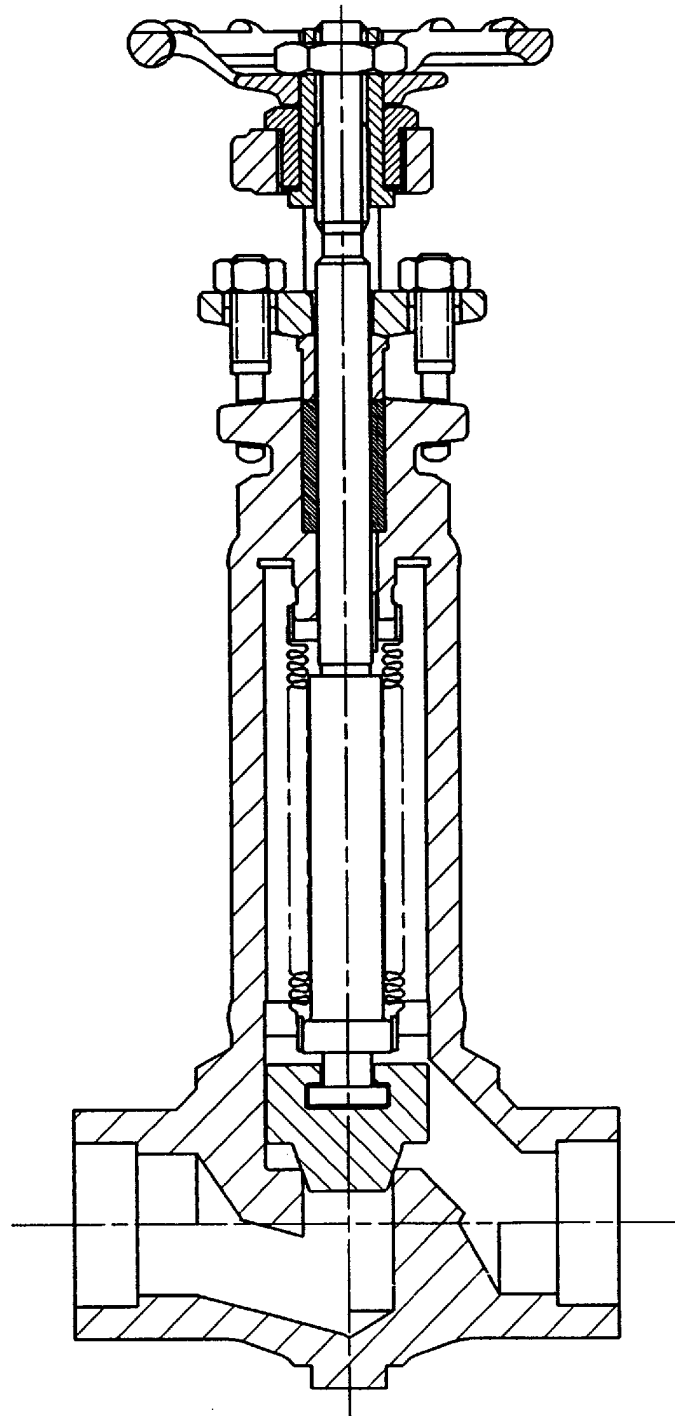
TYPICAL BELLOWS STEM SEAL ARRANGEMENT
